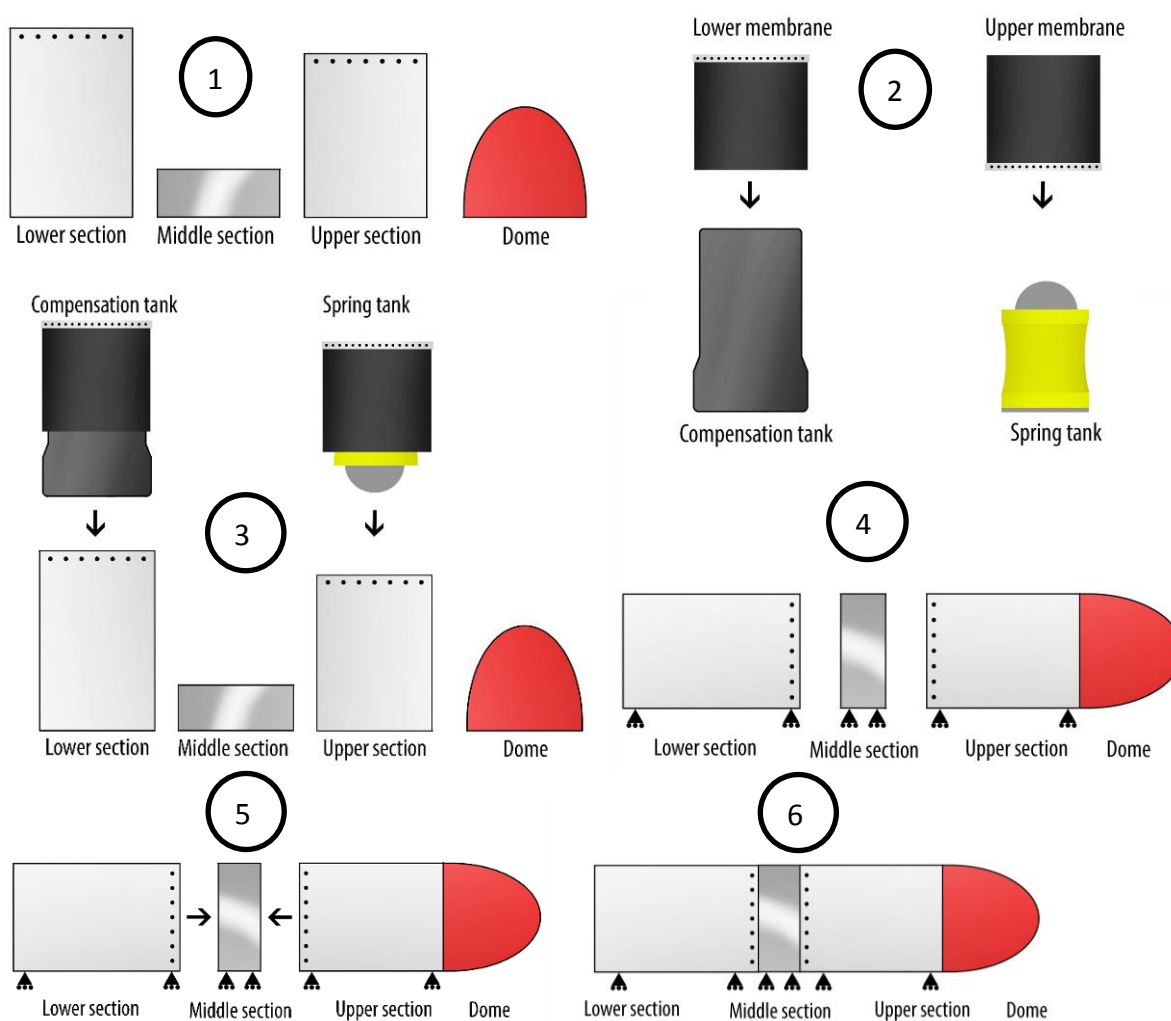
ASSEMBLY OF SYMPHONY DEVICE - OUTLINE: 1-HULL PARTS OF THE SYMPHONY ARE PLACED VERTICALLY; 2-THE MEMBRANES ARE CONNECTED TO THE INNER TANKS USING A CRANE; 3-TANKS WITH
